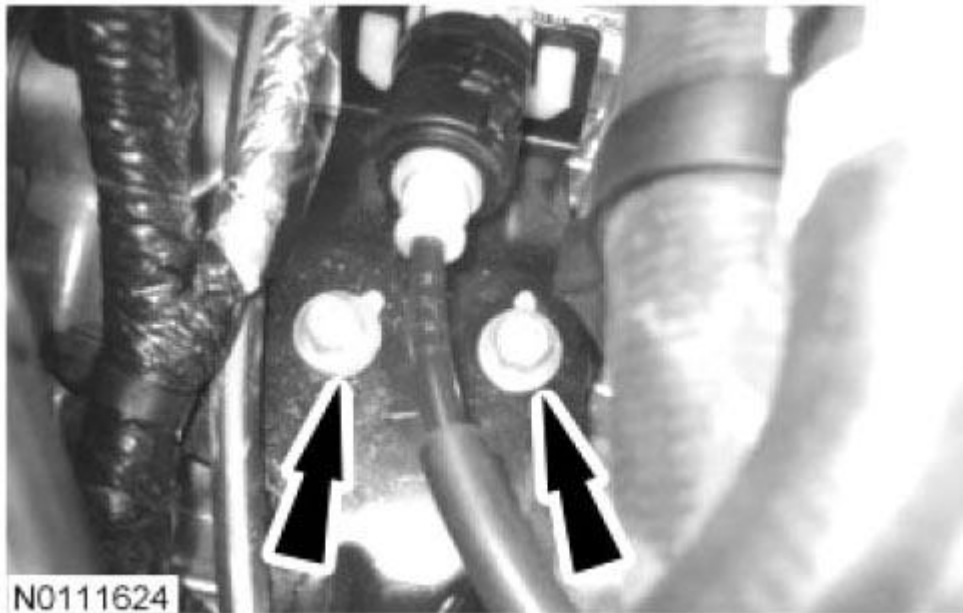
Locating Selector Lever Cable Bracket Bolts
